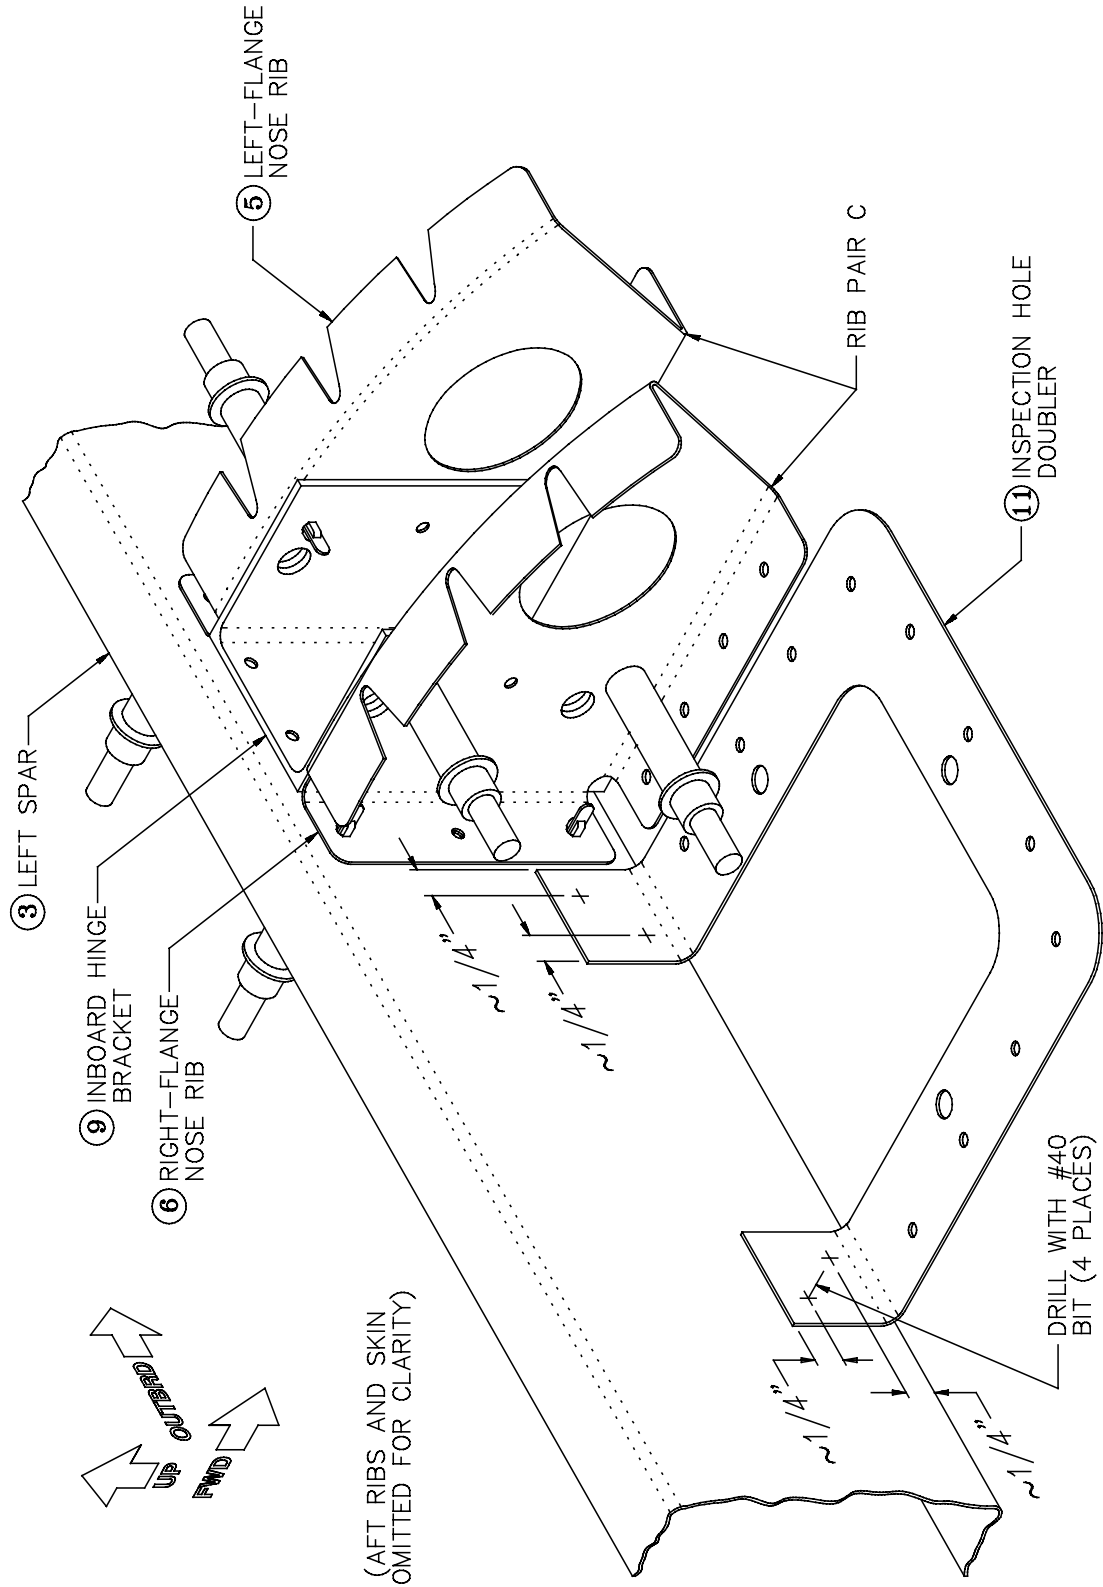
Drilling the Spar Web/Inspection Hole Doubler Rivet Holes
